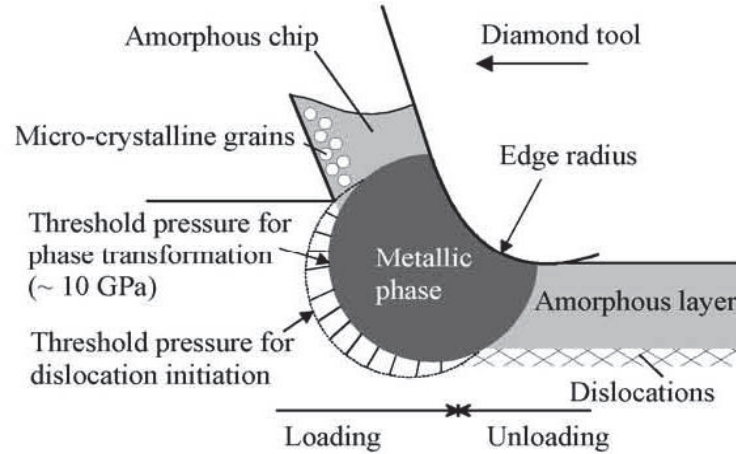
Schematic model for subsurface damage mechanism in silicon during ductile machining [72]
